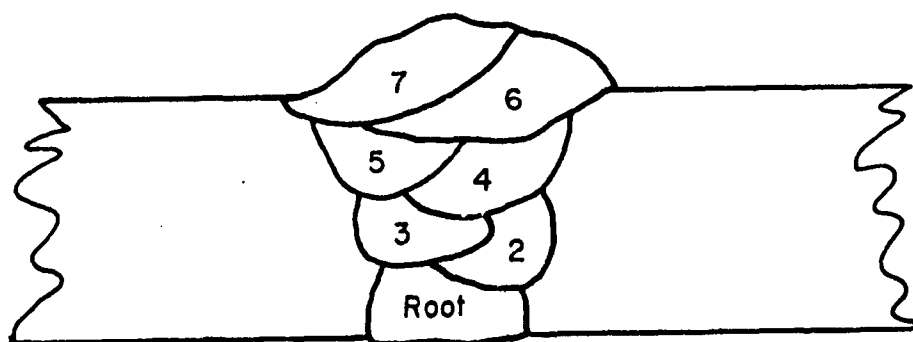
CROSS SECTION OF SEVEN-PASS ANL EXPERIMENTAL GIRTH-BUTT WELD W 27A
